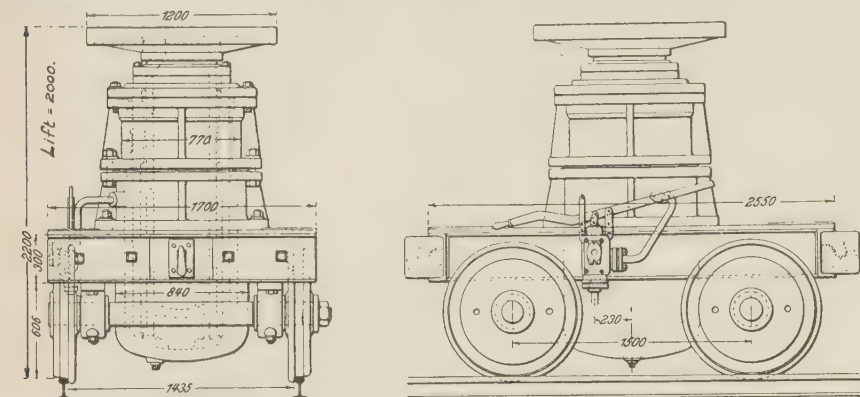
Hydraulic Truck for removing and replacing Converter Bottoms.
